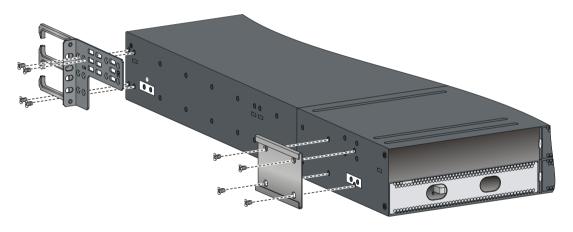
Attaching the mounting brackets and chassis rails to the HPE 5930-32 QSFP+/HPE 5930-32 QSFP+ TAA switch (network port-side mounting position for the mounting brackets)
